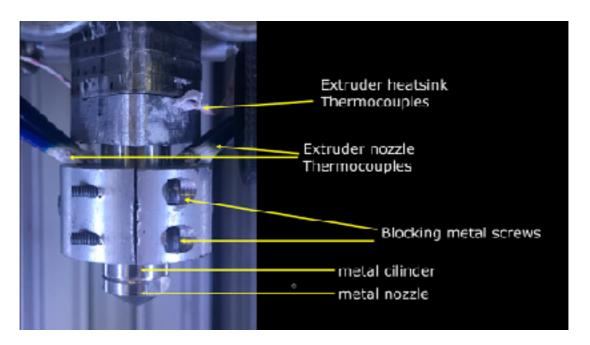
The initial test phases required the disassembly and consequent reassembly of all the components of the lower portion of the Extruder.
